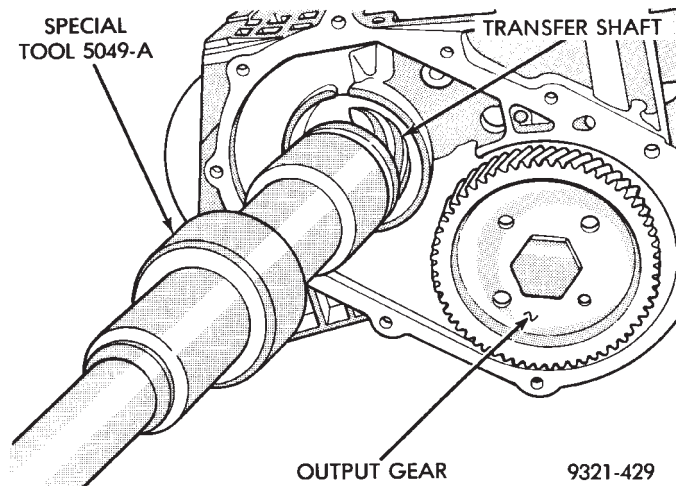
Remove Transfer Shaft Bearing Cup
